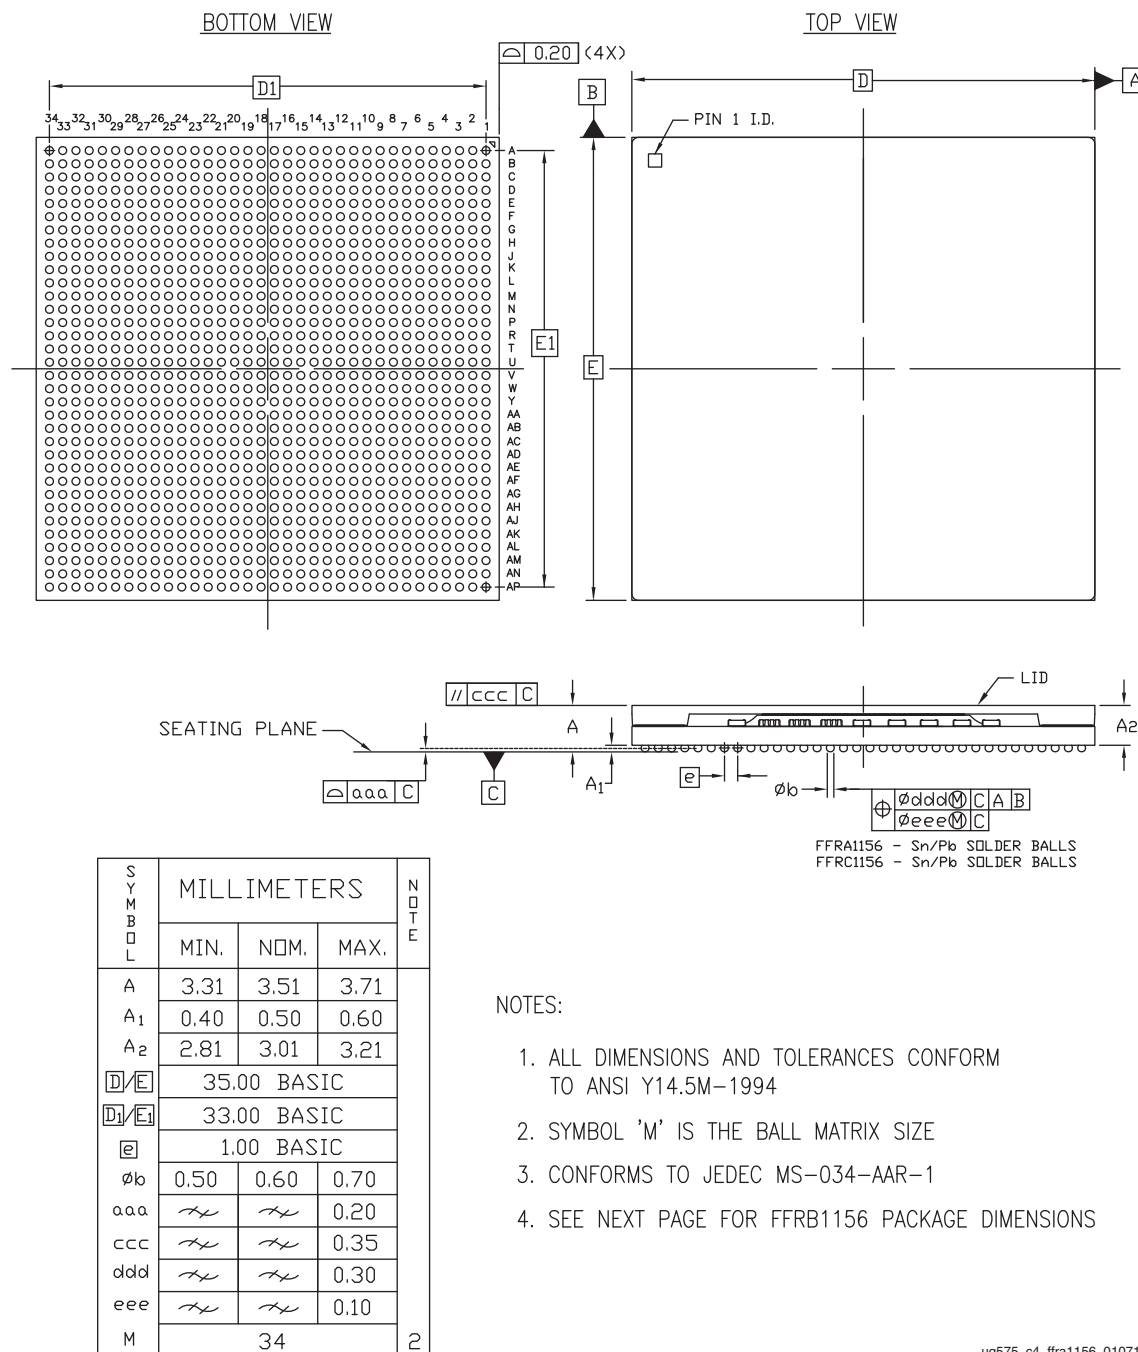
Package Dimensions for FFRA1156 (XQKU15P)
